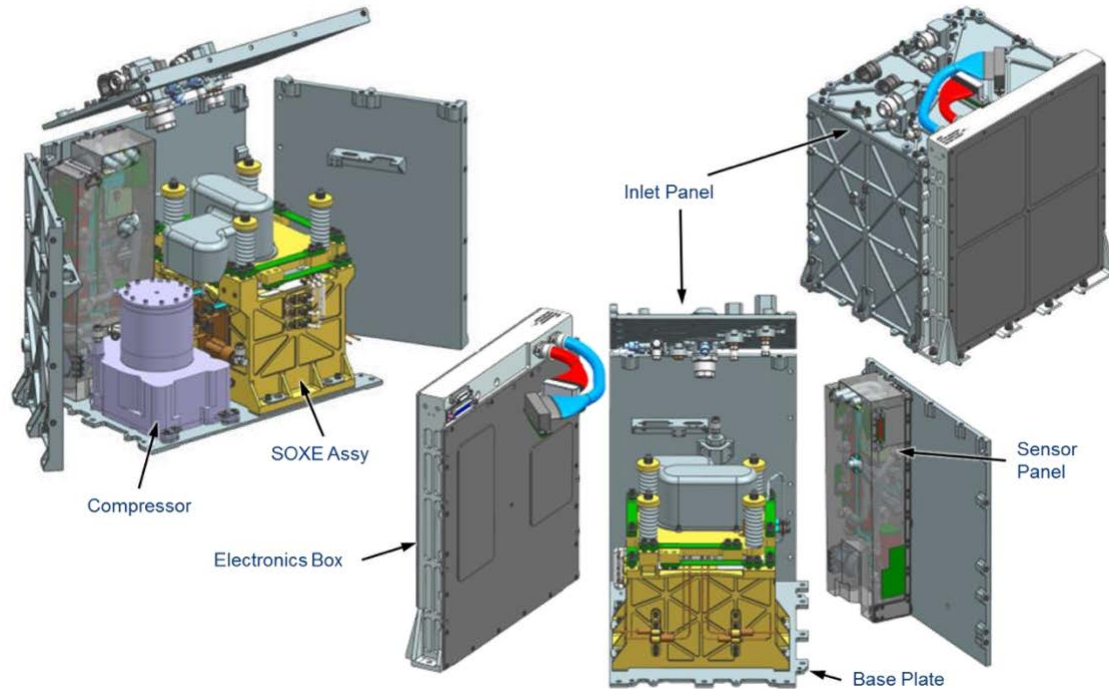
Exploded (left, center) and assembled (right) view of MOXIE, excluding components mounted externally on the rover chassis. The assembled MOXIE has dimensions of 24×24×31 cm. The major component parts are the scroll compressor (left, purple), SOXE assembly (gold, left and center), electronics box (center, right), base plate (center), inlet panel (center, right), and sensor panel (right)
